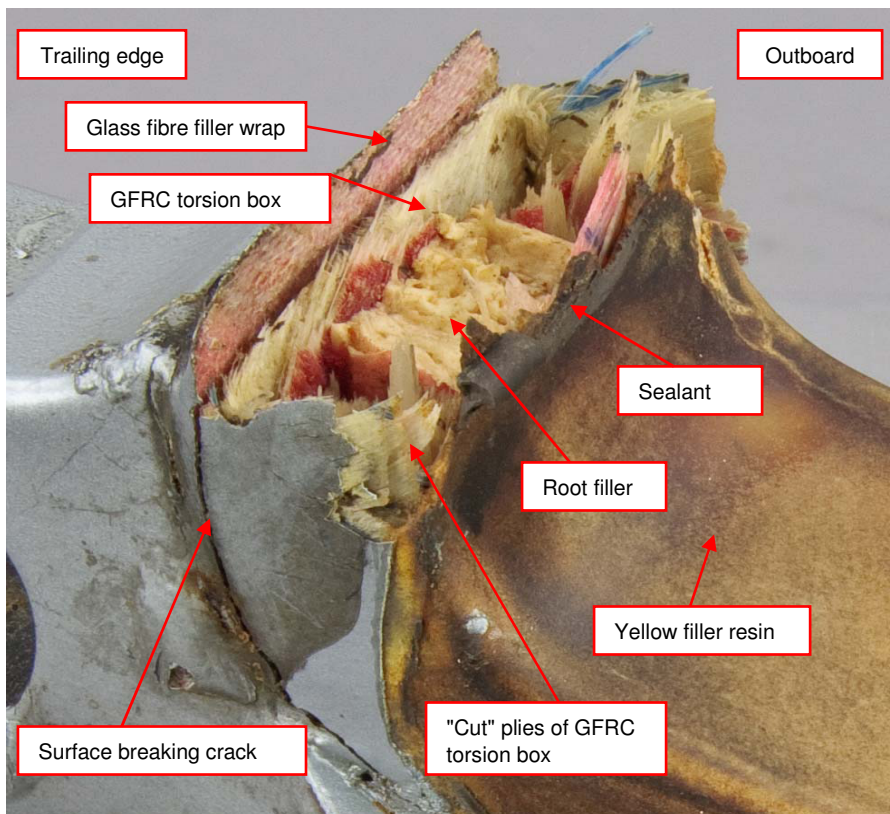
Macro photograph showing detail of the White blade trailing edge arm fracture after the removal of the elastomeric bearing
